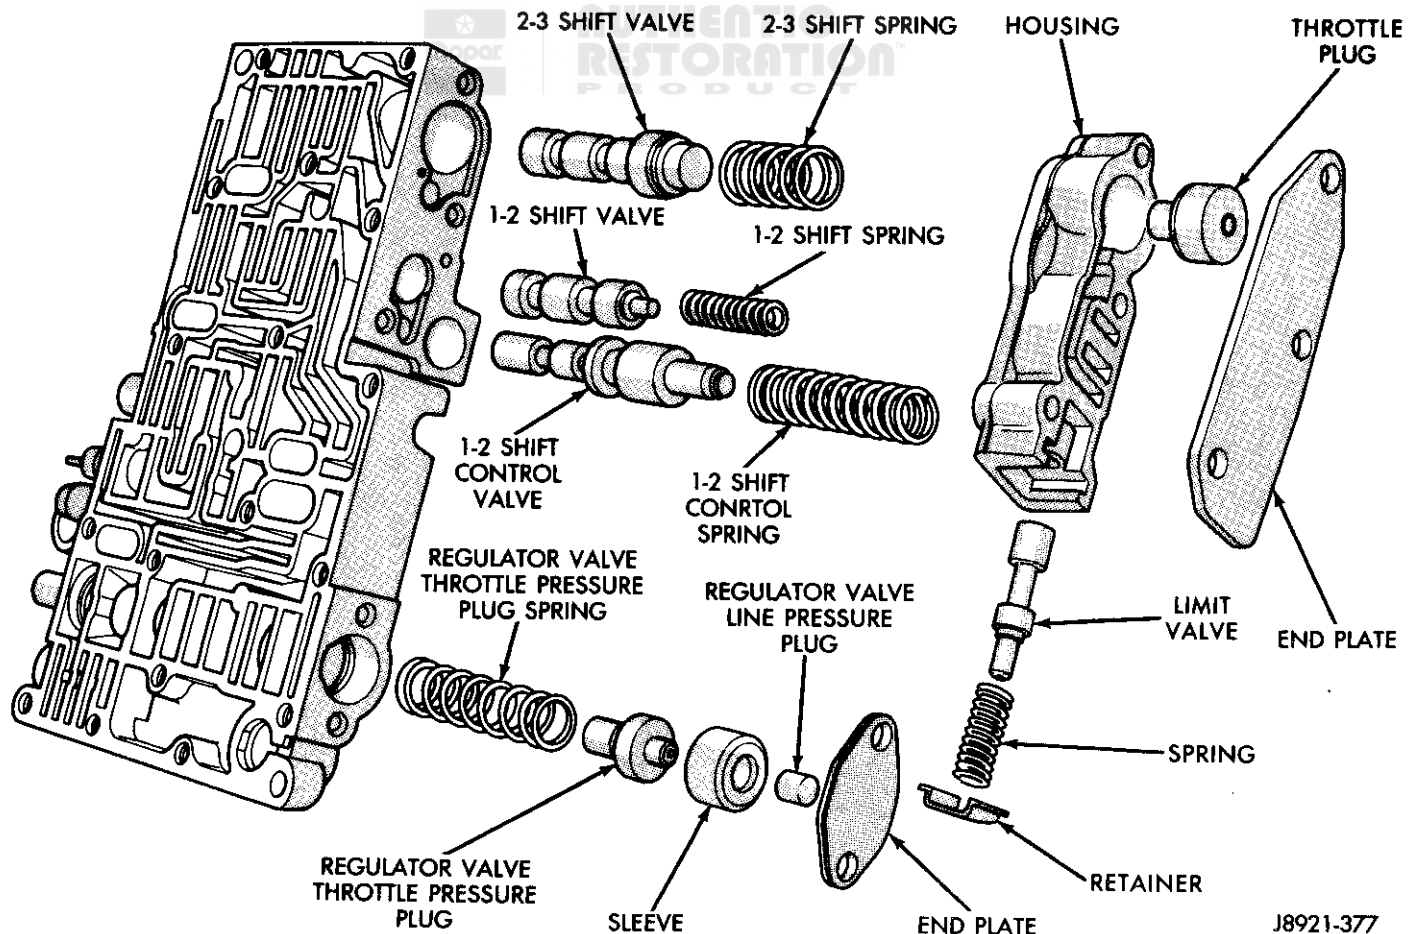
Shift And Pressure Regulator Valves/Plugs
